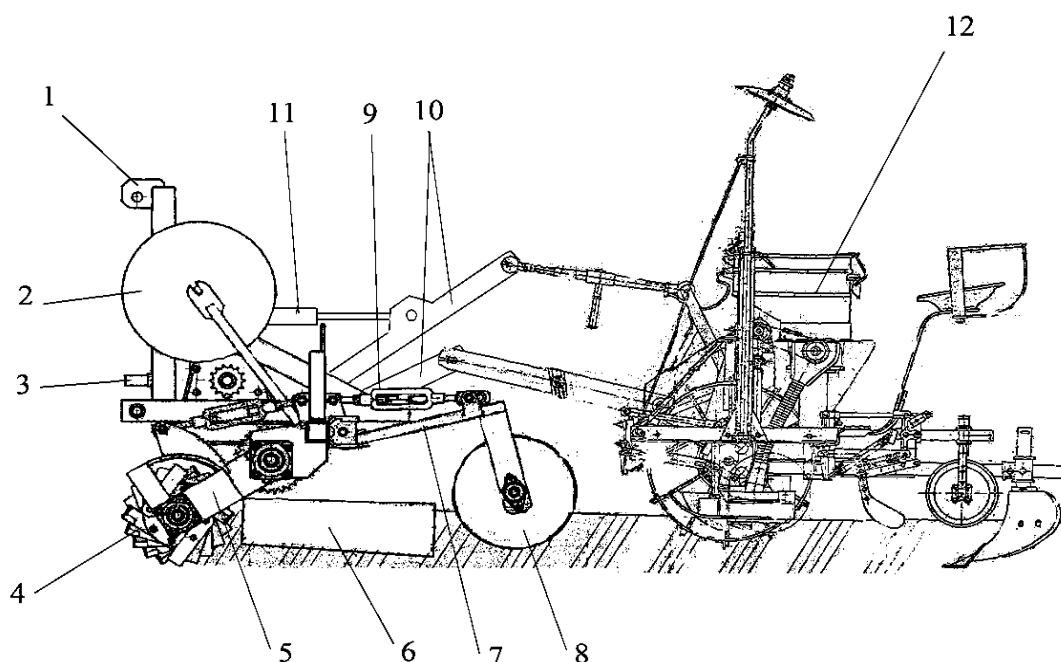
Combined machine for pre-sowing strip milling with simultaneous laying of drip irrigation hoses and the possibility of sowing: 1- milling cutter frame; 2-babina for drip irrigation hoses; 3-milling cutter drive gear shaft; 4-cutter knife drum; 5-knife drum bracket; 6-comb-forming apron; 7-comb bracket-a sealing roller; 8-a comb-sealing roller; 9-a turnbuckle for adjusting the sealing roller; 10-a mounted device for a seeder; 11-a hydraulic cylinder of a mounted device for a seeder; 12-a seeder.
